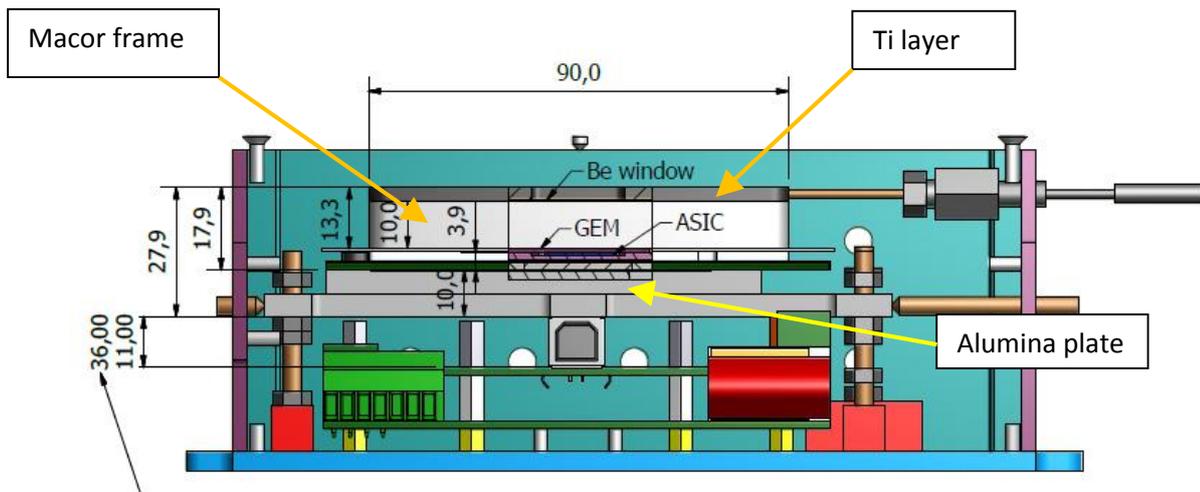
Assembly of the GPD for IXO. Highlighted are the locations of the Macor, Ti layer and Alumina plate.
